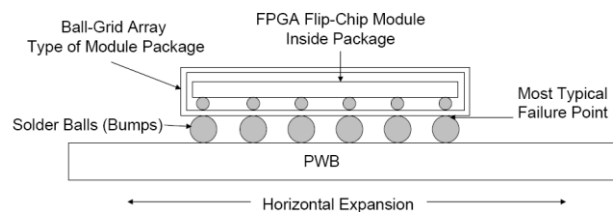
FPGA Package, Solder Ball and Printed Wire Board Diagram Showing a Typical Failure Point.
